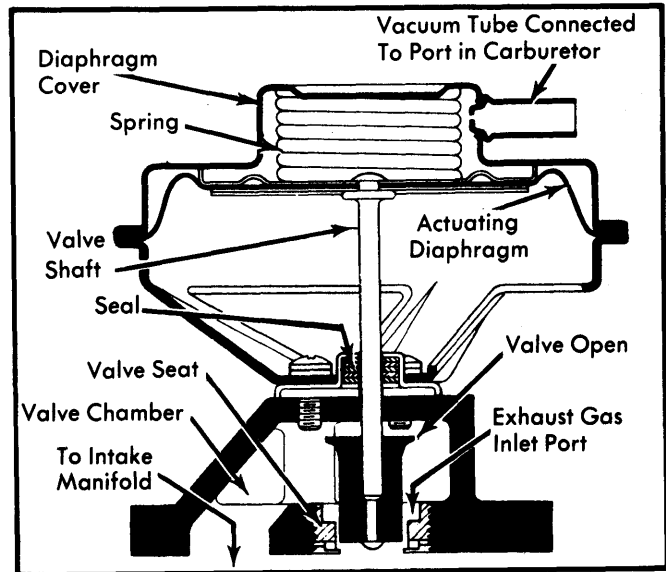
Cutaway View of Ported Type EGR Valve EXHAUST BACK PRESSURE MODULATED EGR SYSTEM
